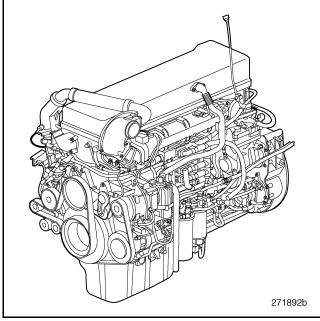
MACK MP8 Euro 4 Engine — Conventional Chassis
